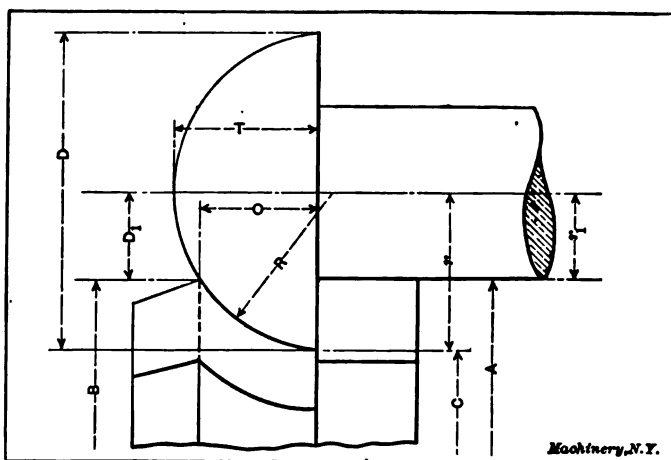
Diagram for Calculating Dimensions of Circular Tools forming Spherical Screw Heads
